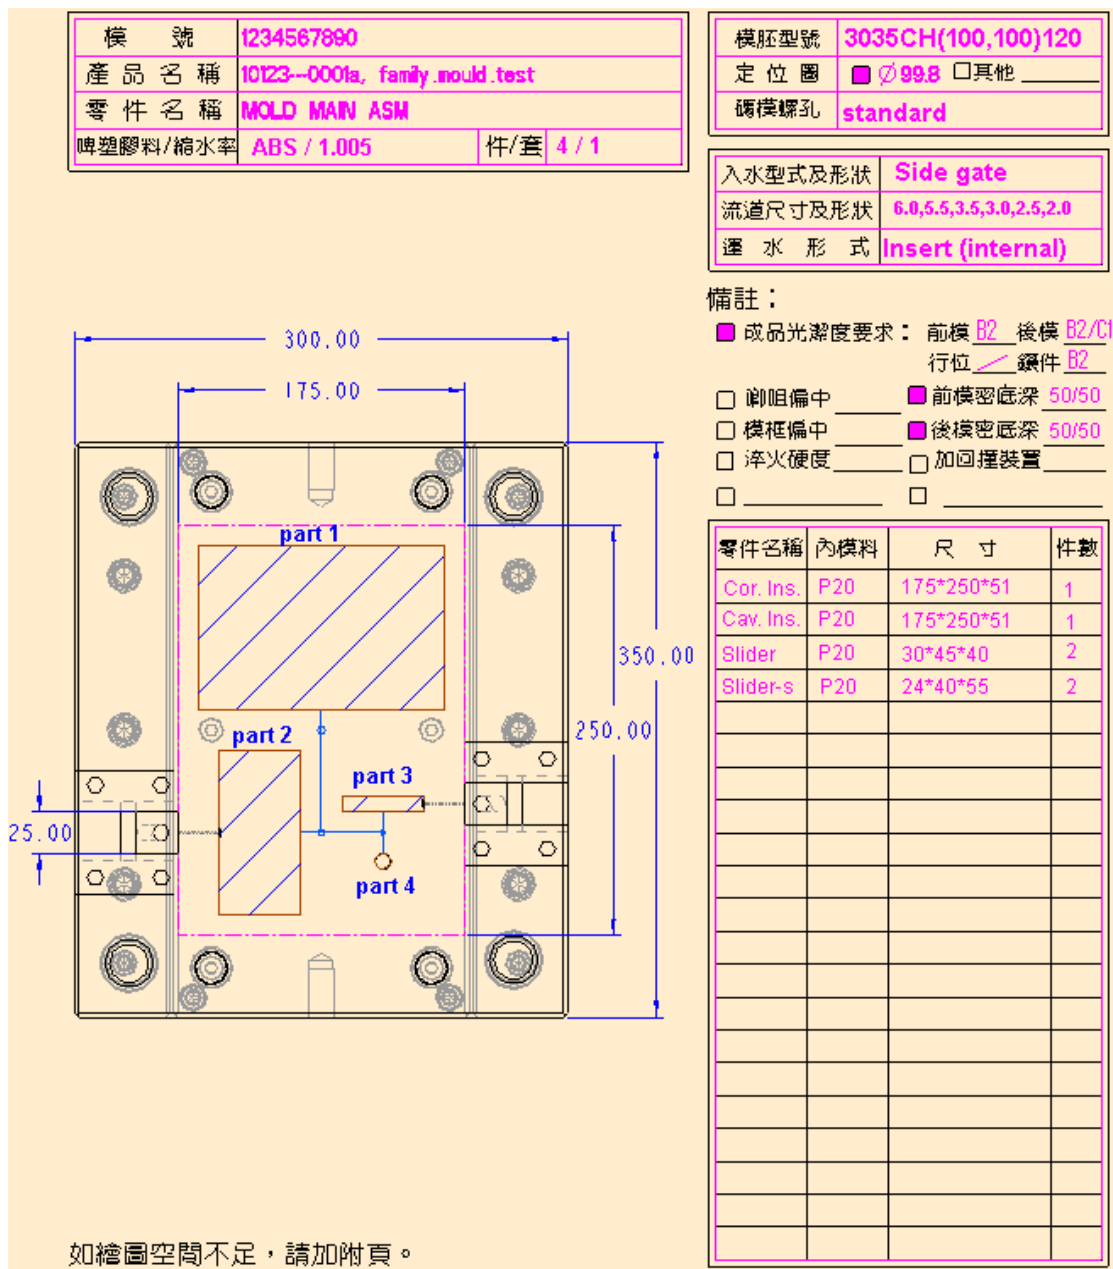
The mould layout drawing generated by the ICMLDS prototype in this experimental case study
